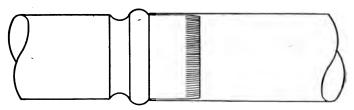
Plain Lap Pipe Joint, Showing Crimped Edge.
